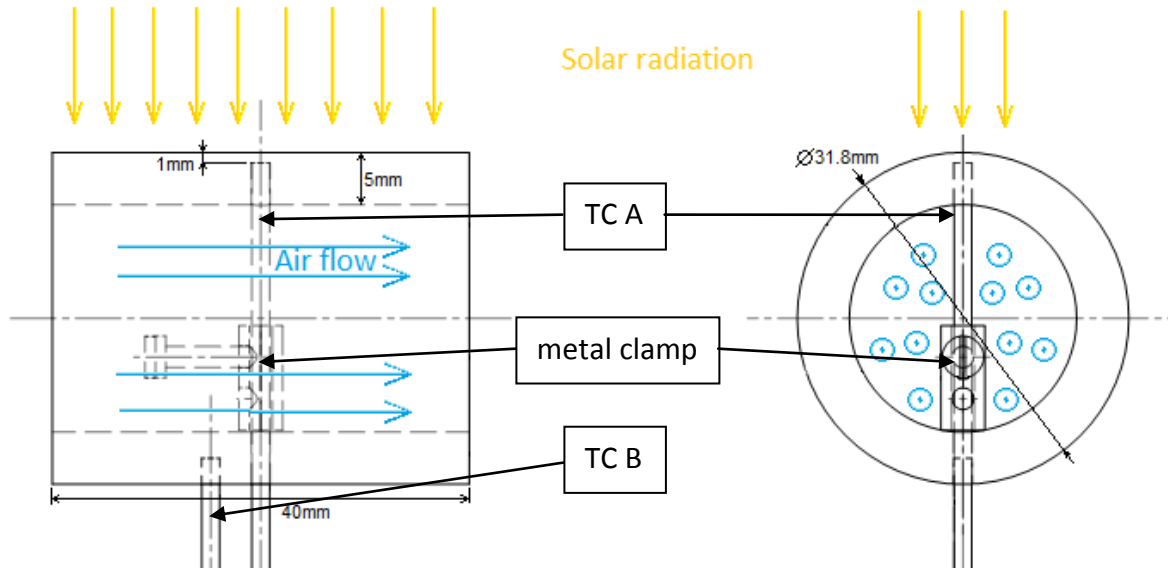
Detail of first thermocouple assembly. A metal clamp is used to hold TCA in place
